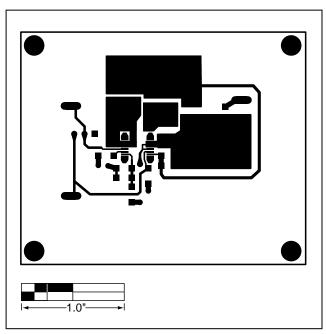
MAX618 EV Kit PC Board Layout—Component Side
